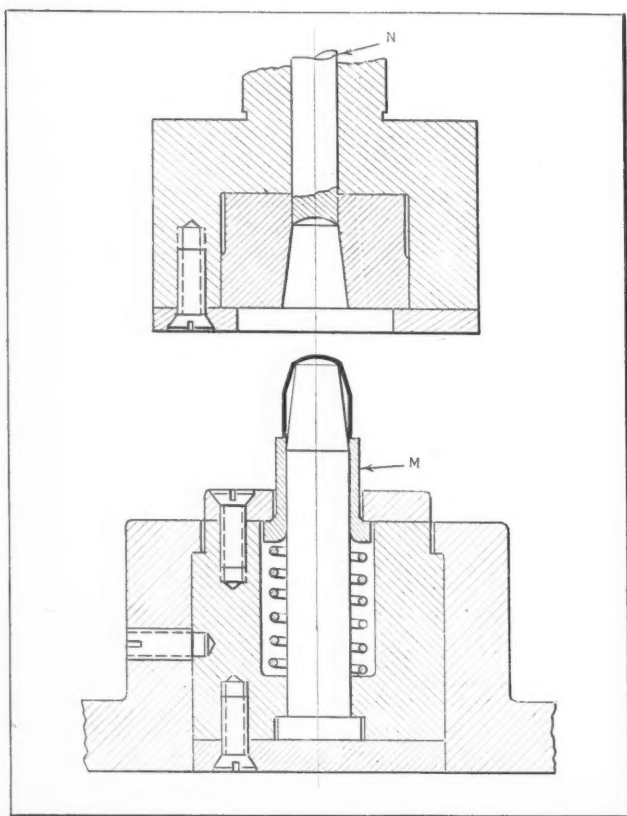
Die for Producing Shape Shown at E, Fig. 2
